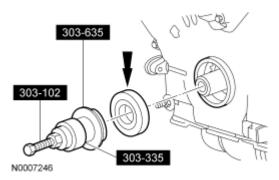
Locating Crankshaft Front Seal Courtesy of FORD MOTOR CO.
